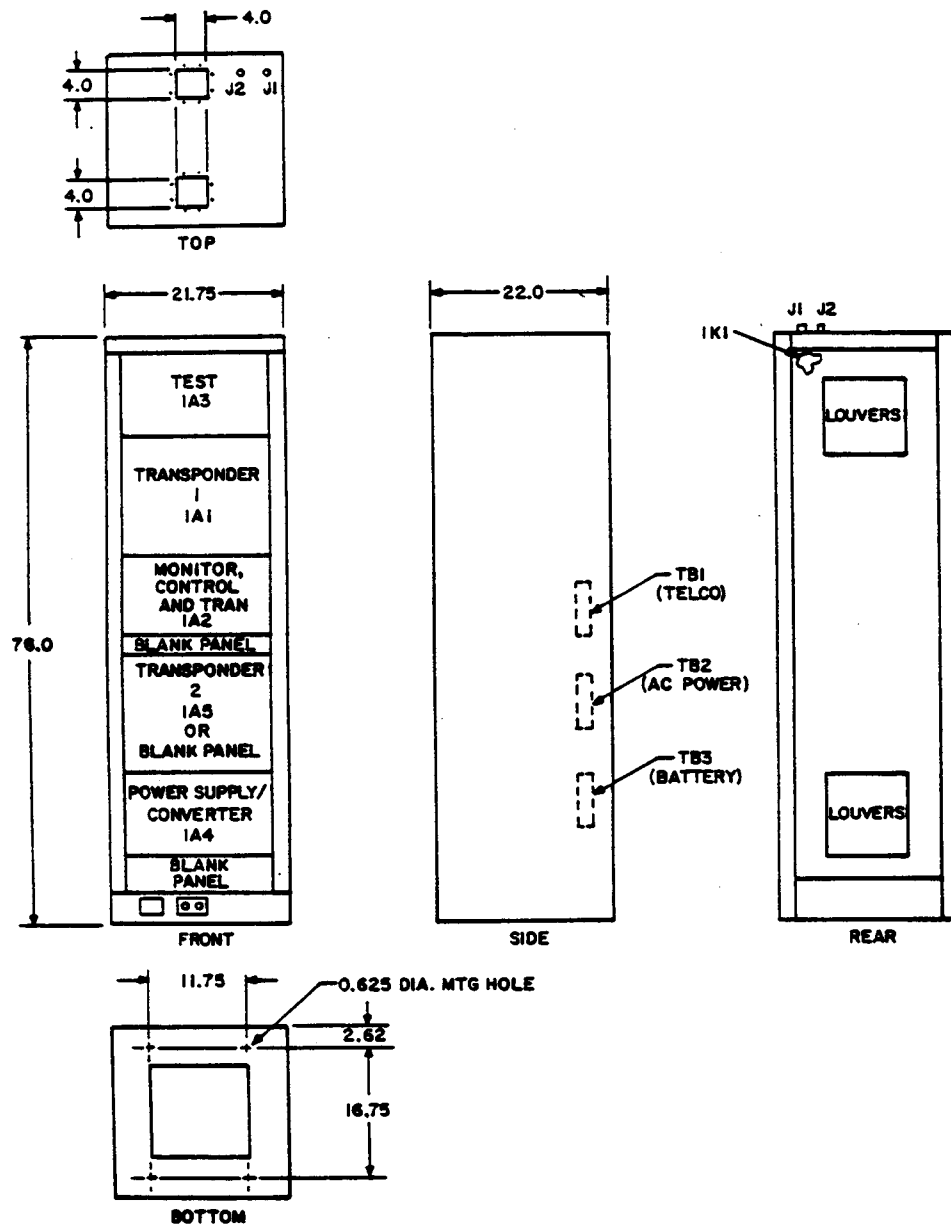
DME EQUIPMENT RACK, OUTLINE DIMENSION, AND INSTALLATION DETAILS
